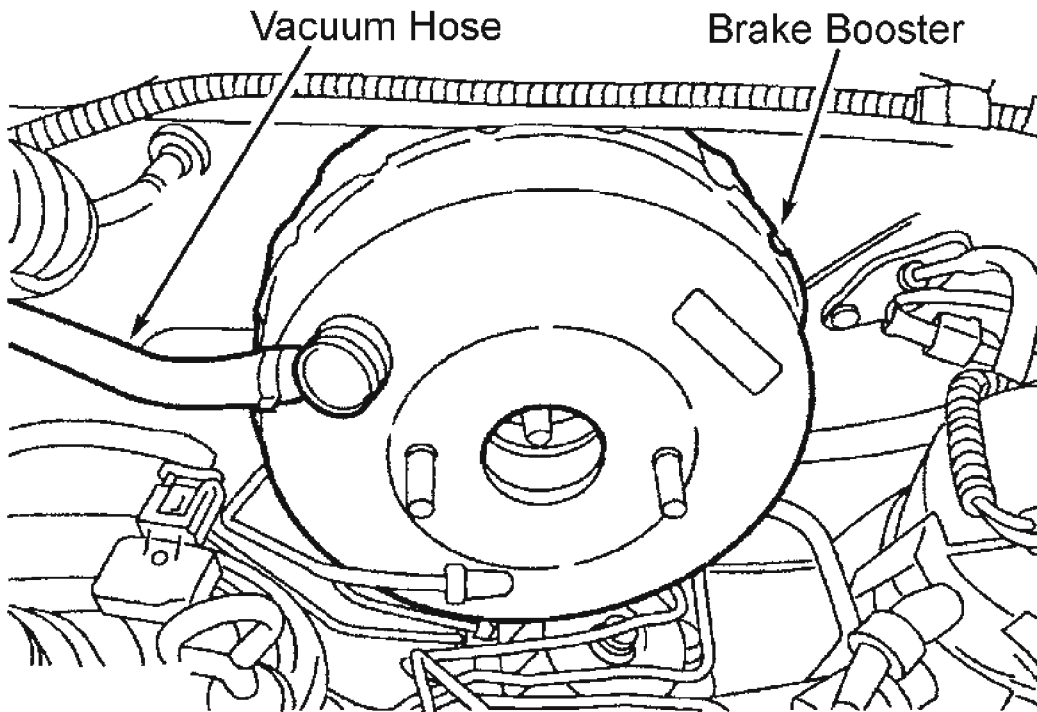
Identifying Power Brake Booster Pushrod Bracket Nuts
